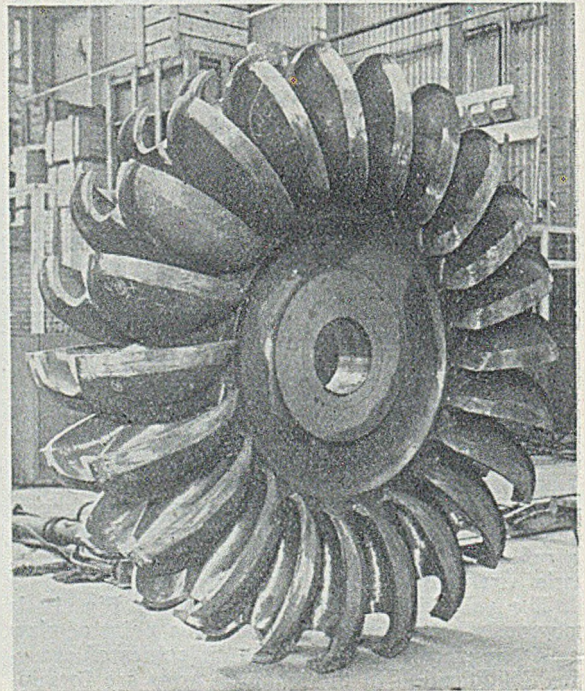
Pelton Wheel with Buckets Cast Integrally.
